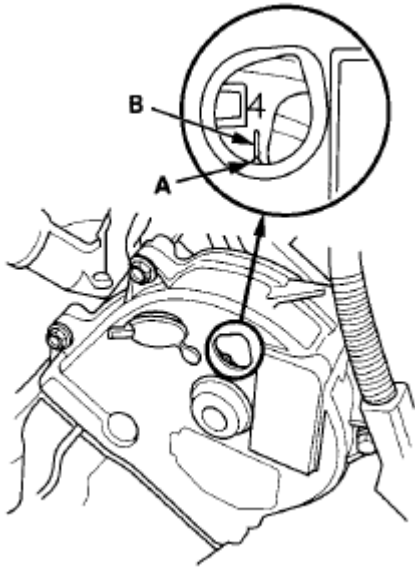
Identifying Pointer And TDC Mark On Piston No. 4
